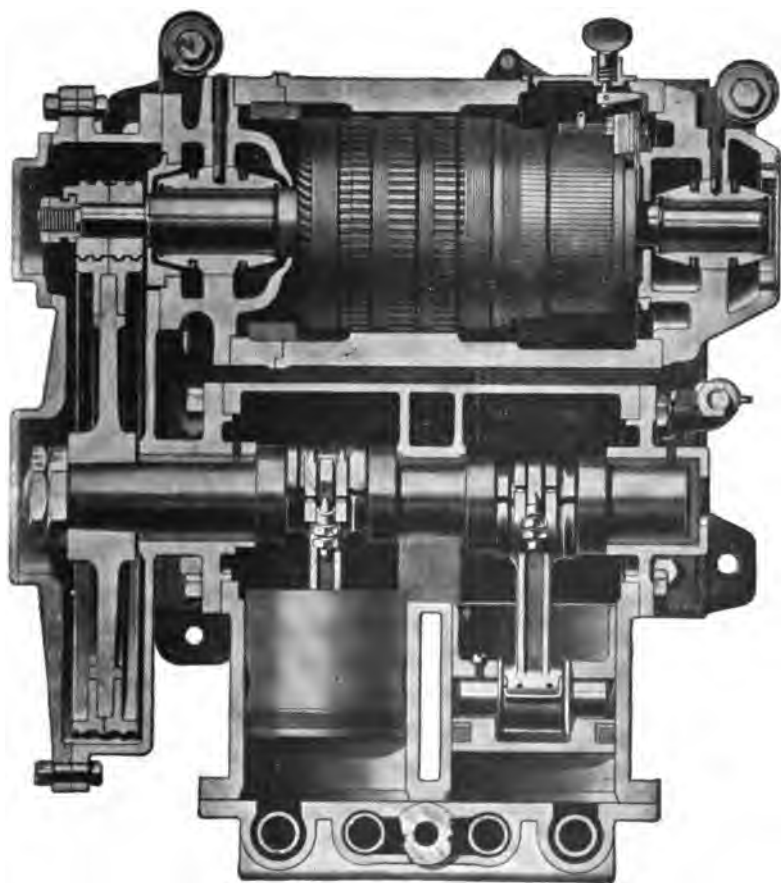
Horizontal Section through a Compressor with Motor at Side of Crank-case.
